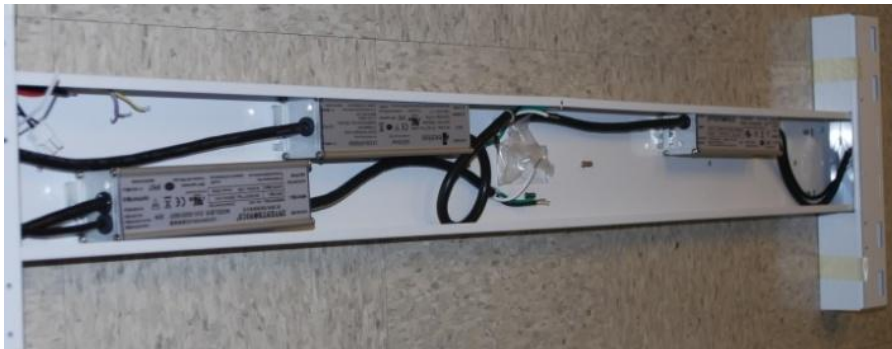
Example for an installed LED Driver in large gear tray. Drivers are at the minimum horizontal spacing.
